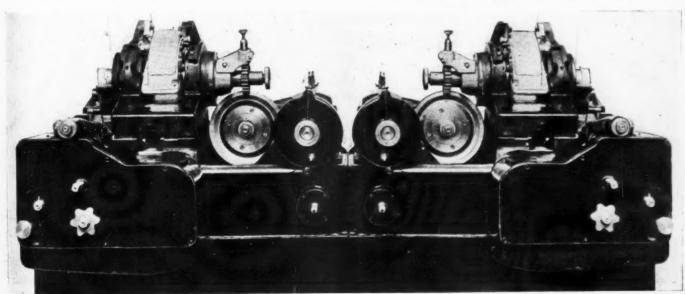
Front view of full-automatic gear grinder, showing right and left hand machines, with all guards removed
